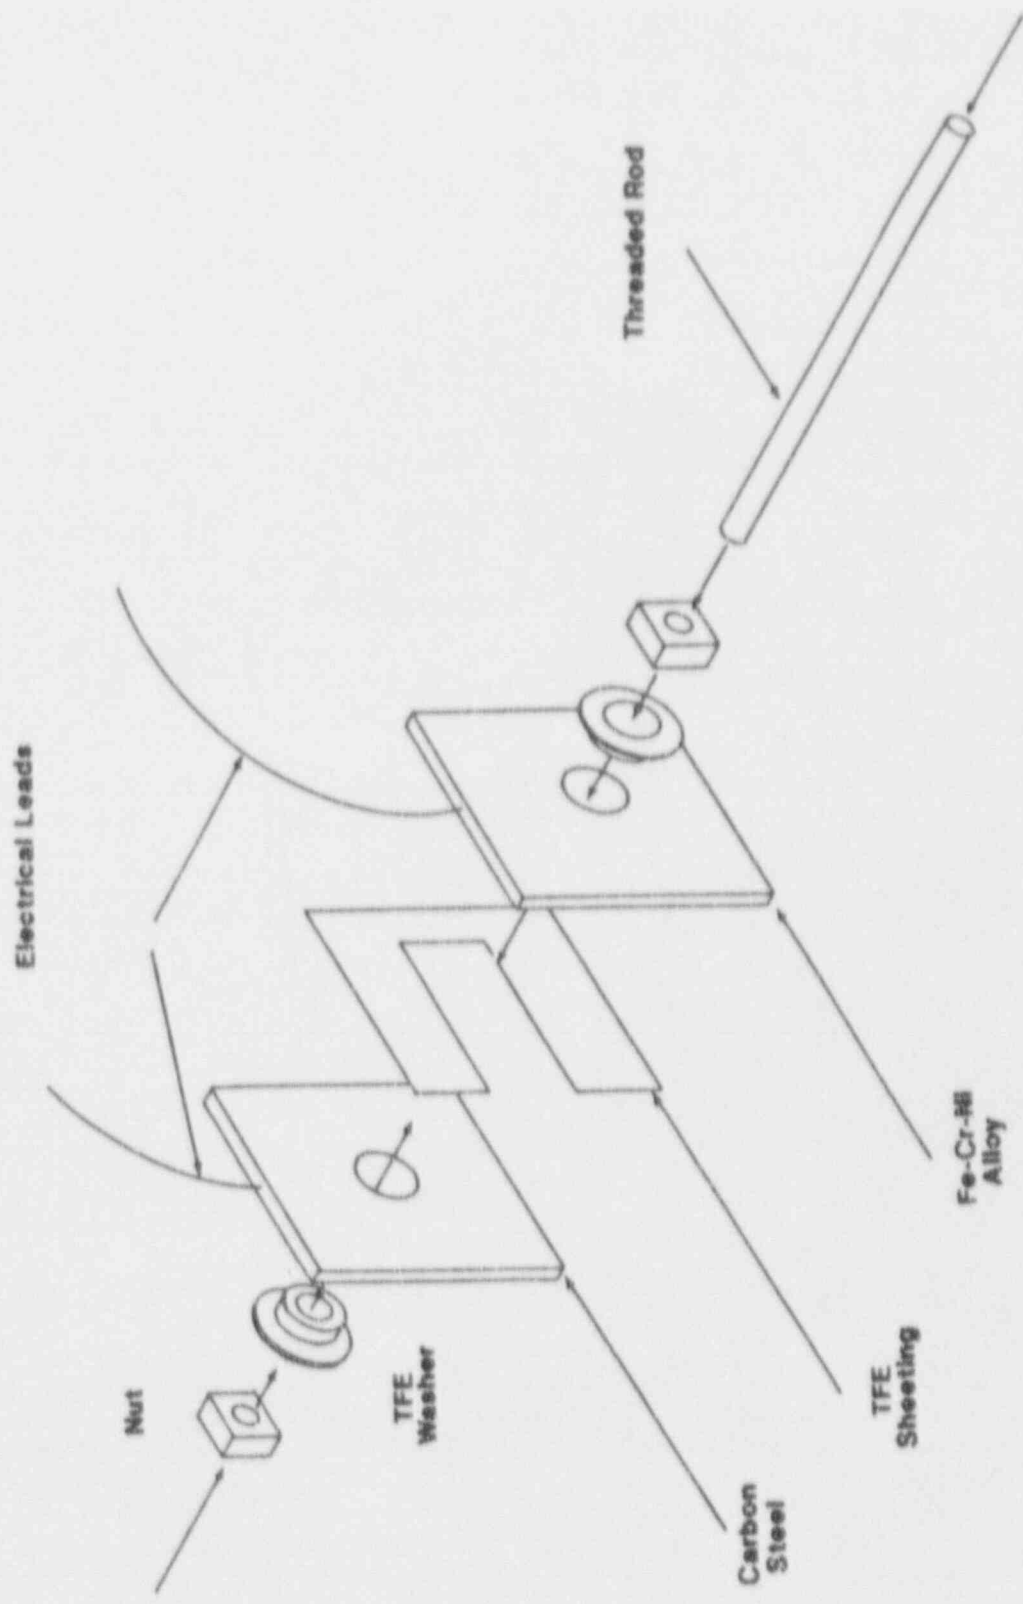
Schematic Of Borehole Liner - Container Specimen Assembly -
